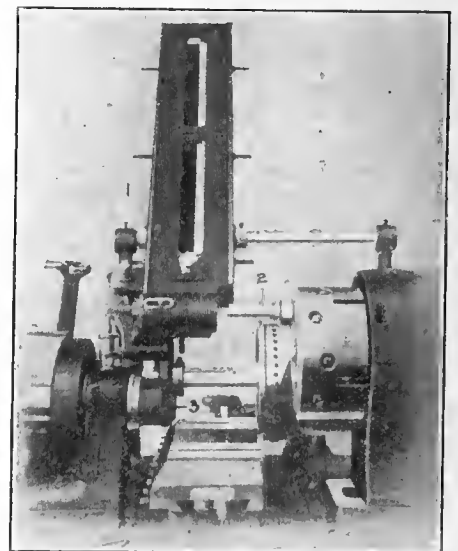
TILTING MAGAZINE ATTACHMENT—CLEVELAND AUTOMATIC MACHINE CO.
